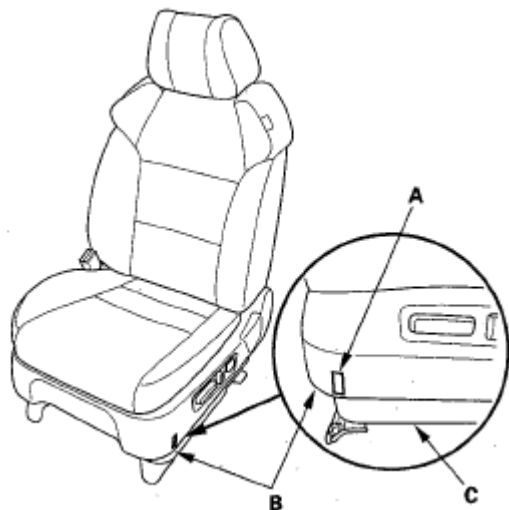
Identifying Location On Seat's Outer Cover Where Front Riser Cover Meets Seat Riser
